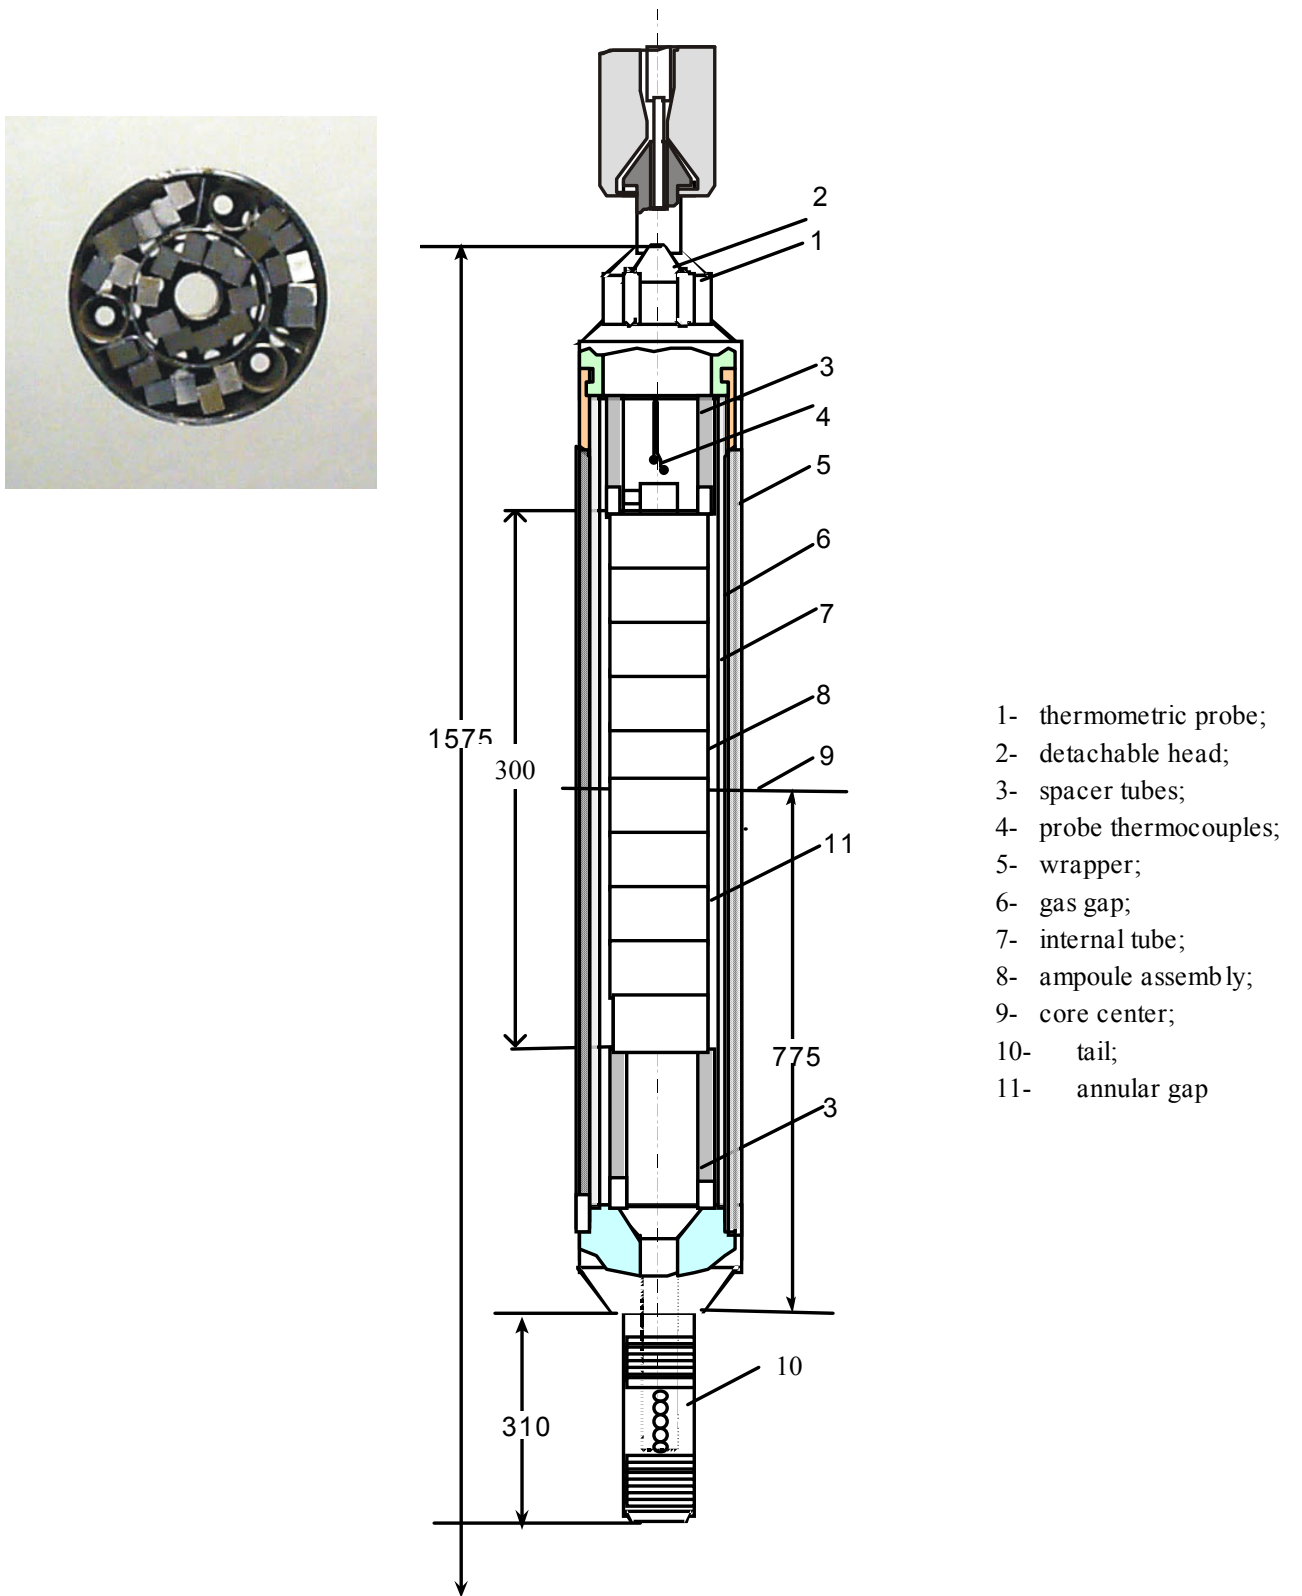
Dismountable assembly with a thermocouple. (Detail: Capsule 6 from above, filled with KLST mini impact specimens)
